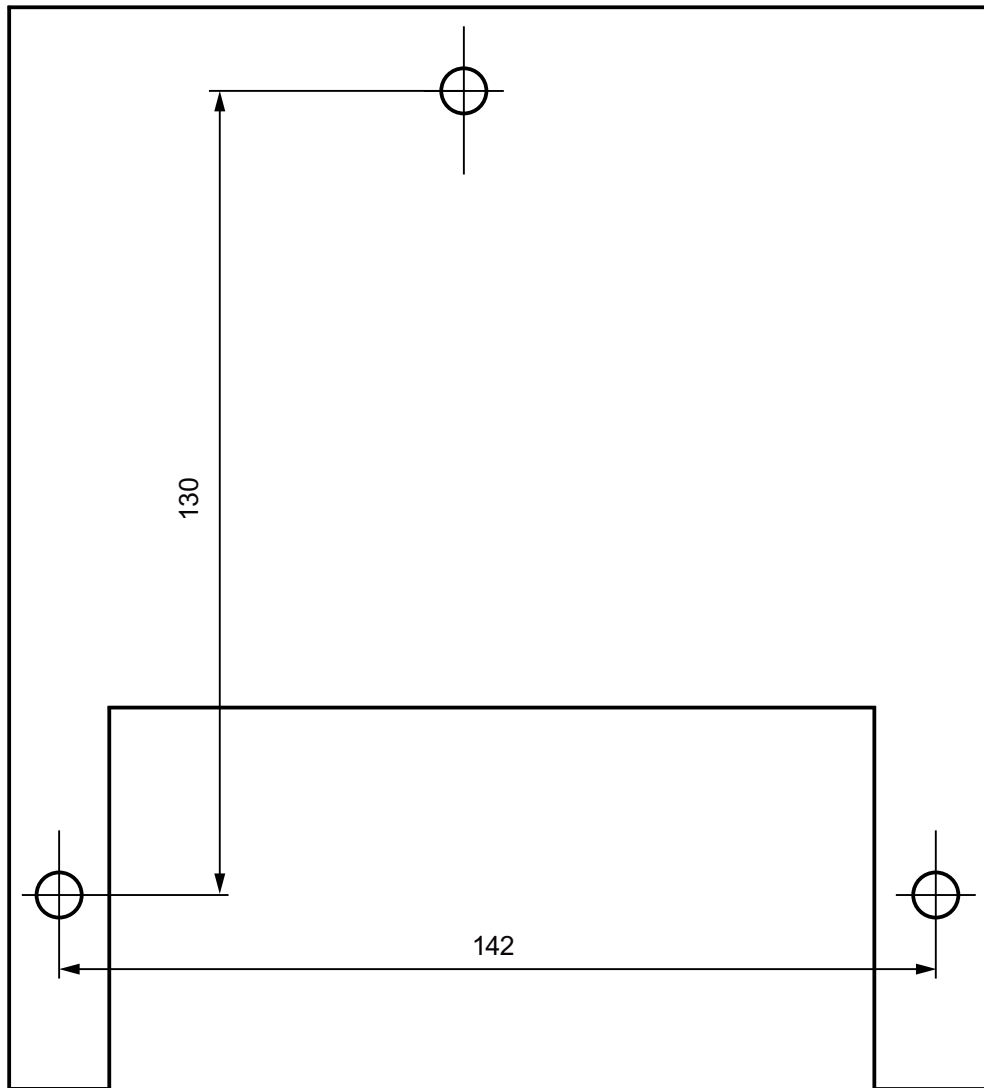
Drilling pattern - All dimensions specified in millimeters.
